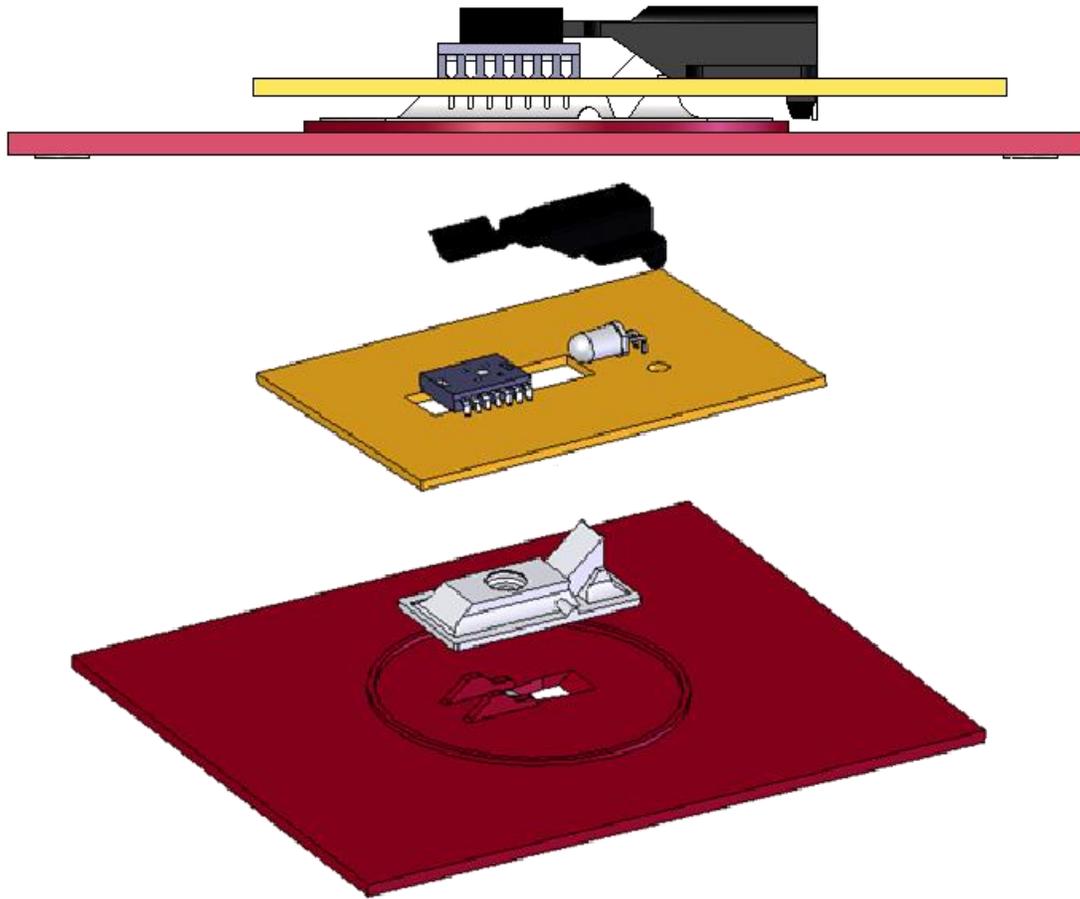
3D Assembly for Mounting Instructions of PAW3702 Mouse System
